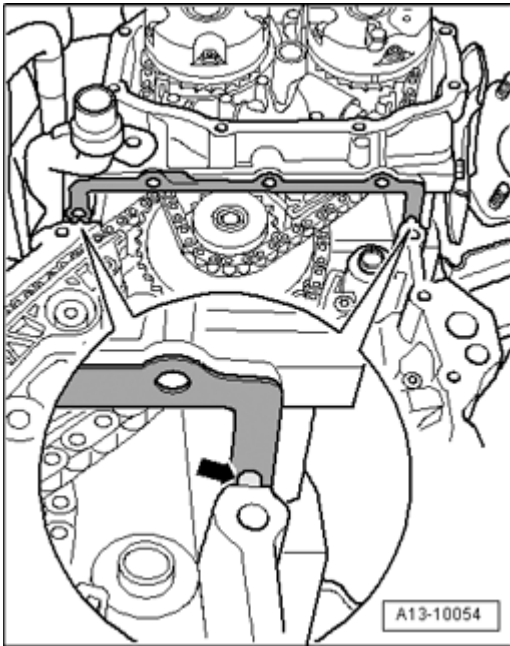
Cleaning Old Sealant From Holes In Cylinder Head Gaskets
